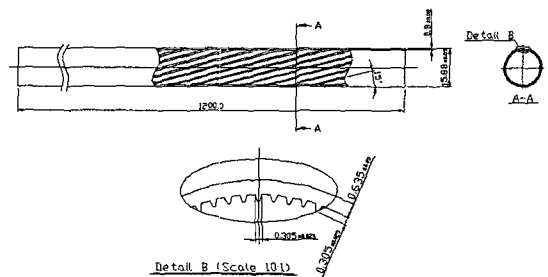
Cross-sectional view of helical grooved thermosyphon
